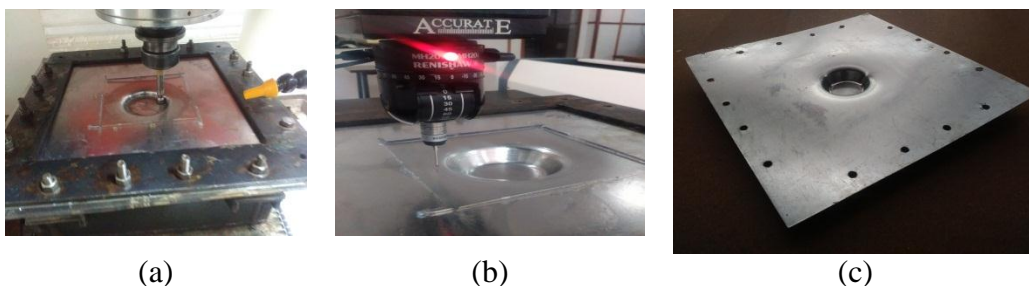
(a) Forming of component, (b) measuring of component and (c) unclamped view of component at third stage
